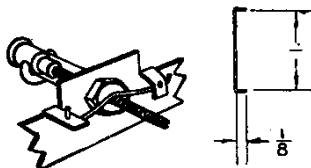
, left, shows the music wire spring applied to the adjusting screw.
